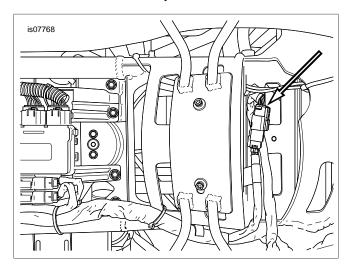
Rear Lighting Connector: FLHTCUTG
